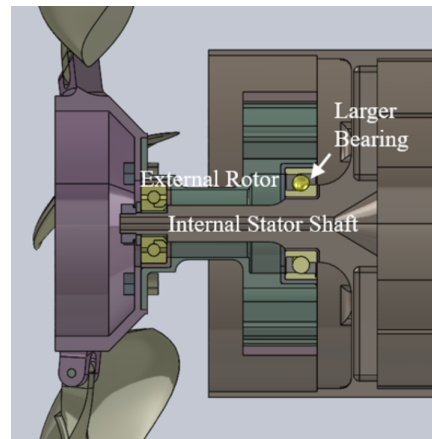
Motor structure, showing the layout of the motor inside the X-57 nacelle with the propellers attached to the shaft (left side). The dark green portion is the External Rotor, labeled in the figure, is the rotating part.
